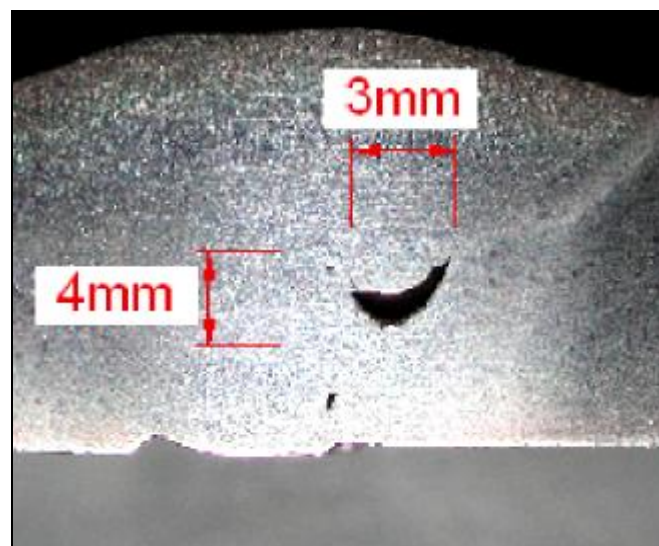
Welded Bead Section Containing a Lack of Fusion [6].
